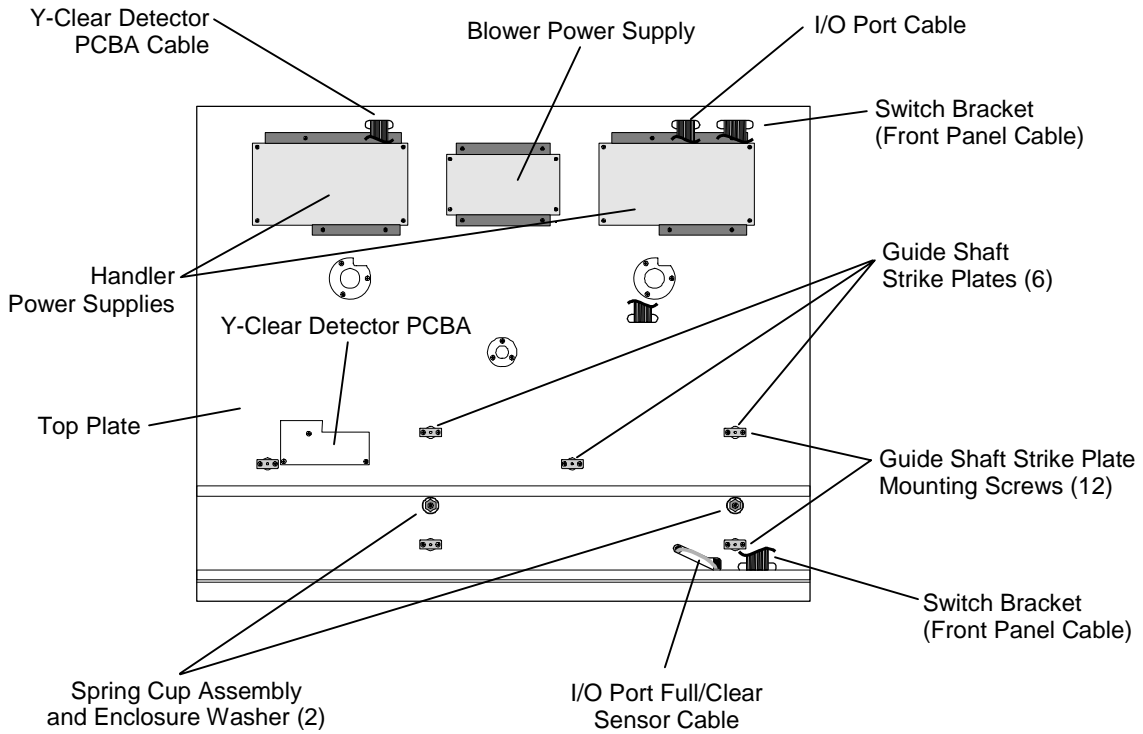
Dual Bay TLS Cabinet – Top View (Top Panel Removed)
